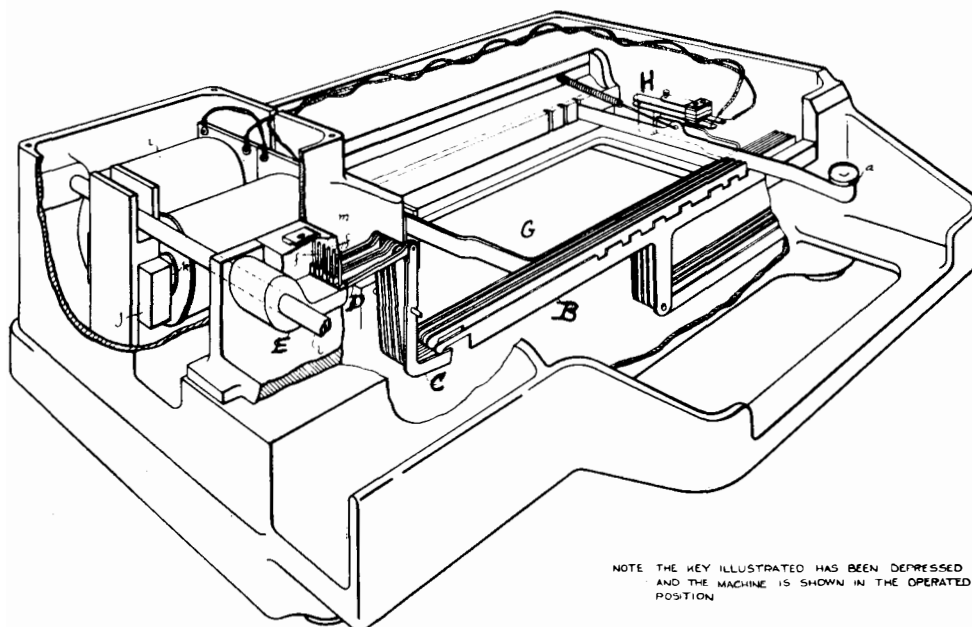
SKELETON OF MACHINE. ONE KEY DEPRESSED.
